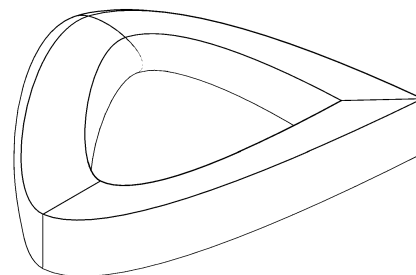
Loft solid with the Close surface or solid check box selected
